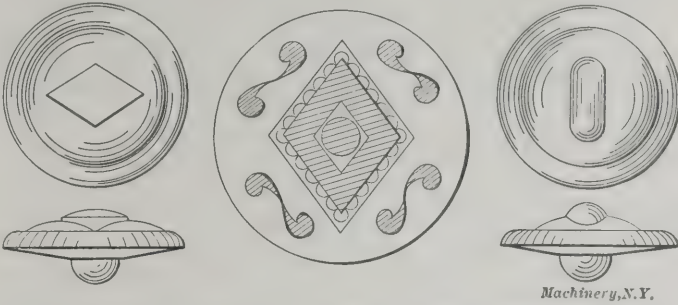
Fancy Covers which are blanked singly Machinery, N.Y.
